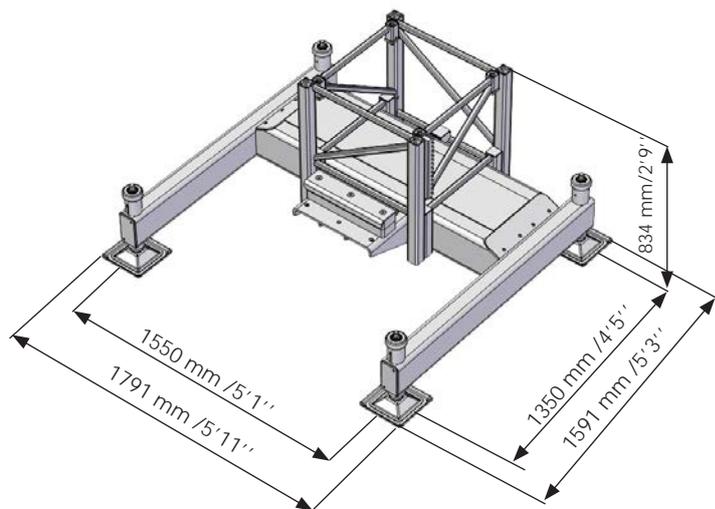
SC4000 single with dimensions. All outriggers extended, turned out on mast side only.
